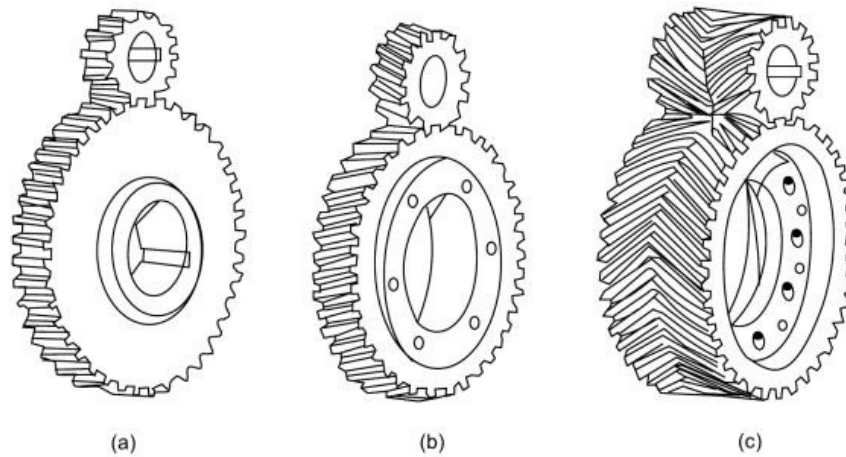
Gears: (a) Spur (b) Helical (c) Herringbone
